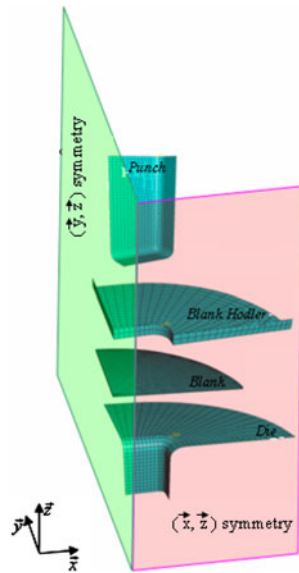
Geometry and dimensions of the rectangular cup forming tools
